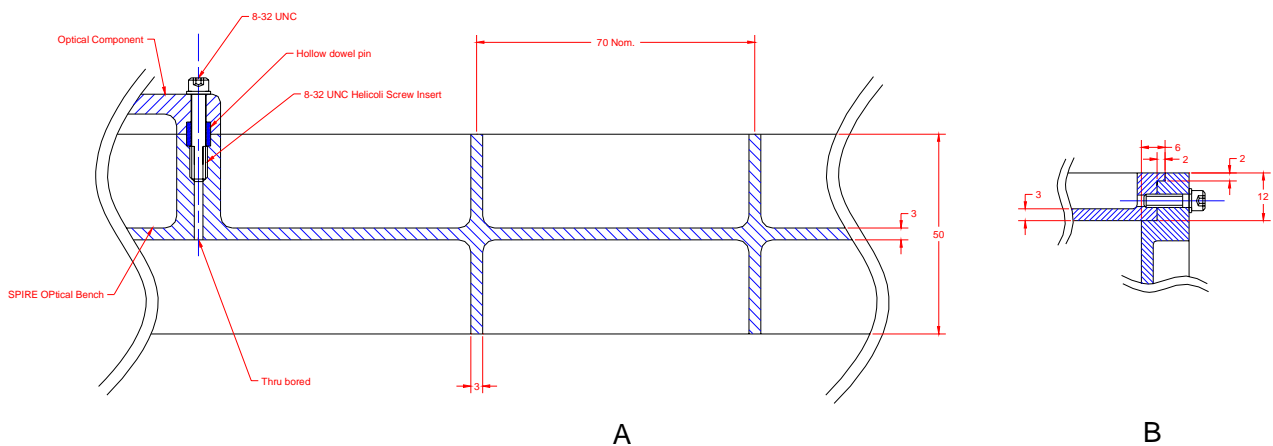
Details of (A) SOB lightweighting and optical component interfaces and (B) cover joint design.
